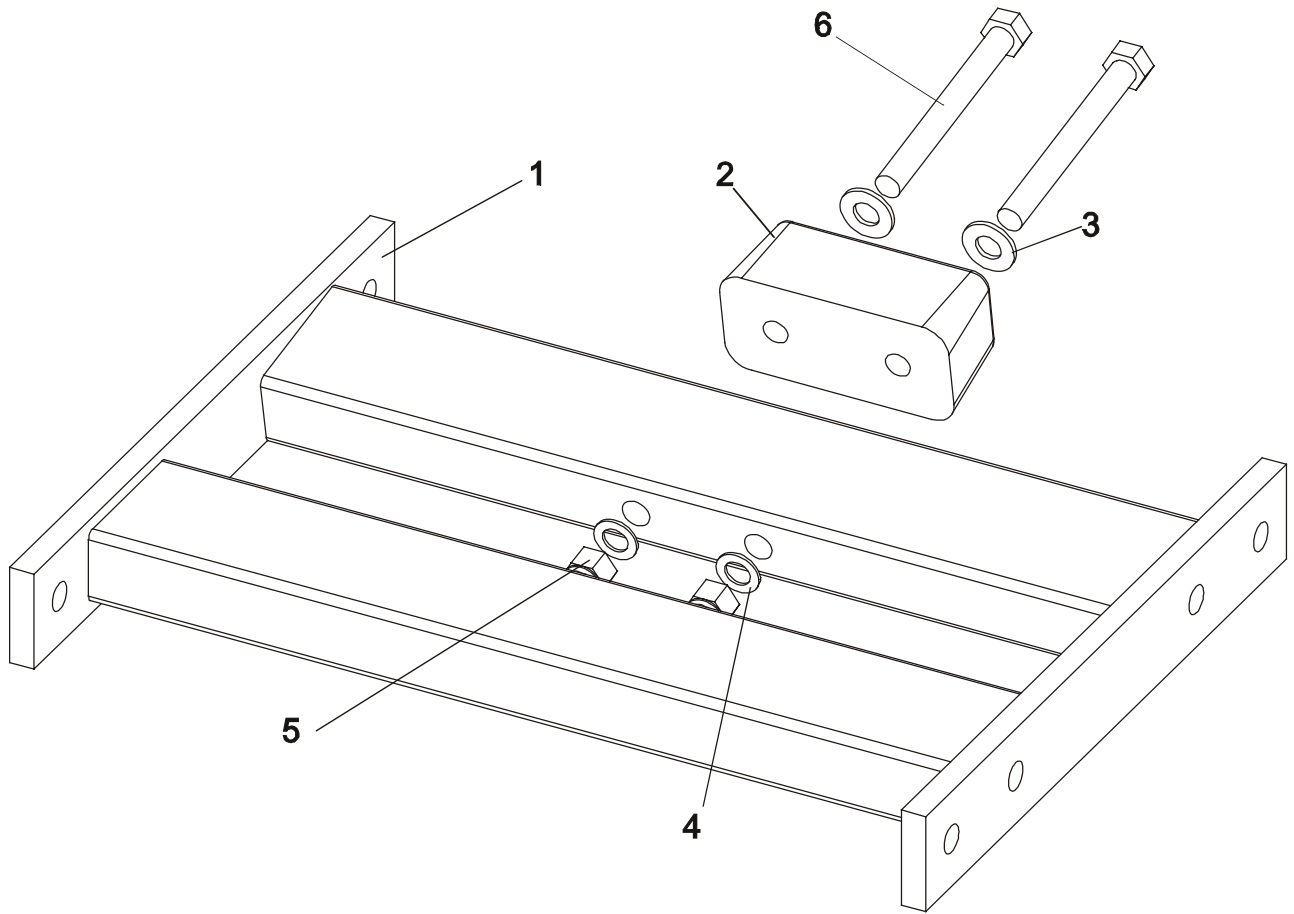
PLATE LOADED ABDUCTOR SEAT FRAME ASSEMBLY
